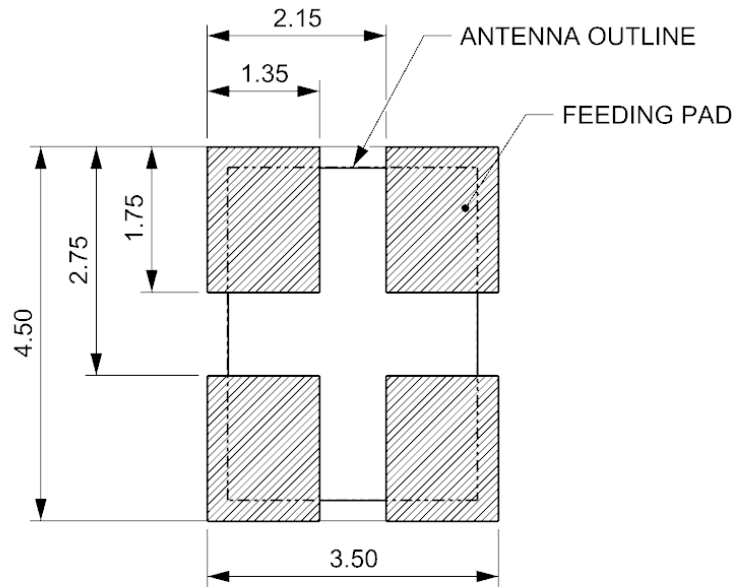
PCB BOARD SCHEMATIC PICTURE
